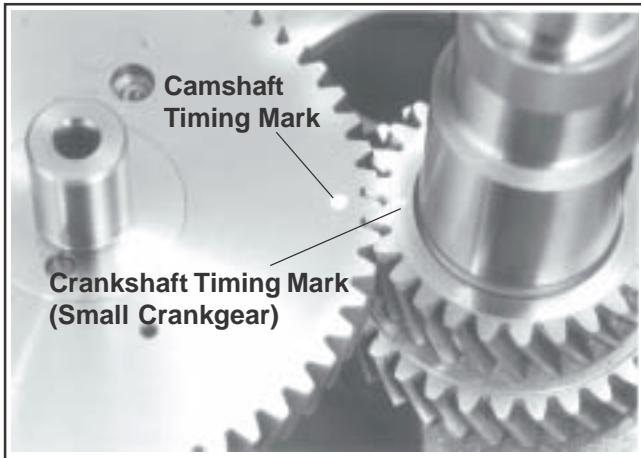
Aligning Timing Marks on Crank Gear and Cam Gear.
